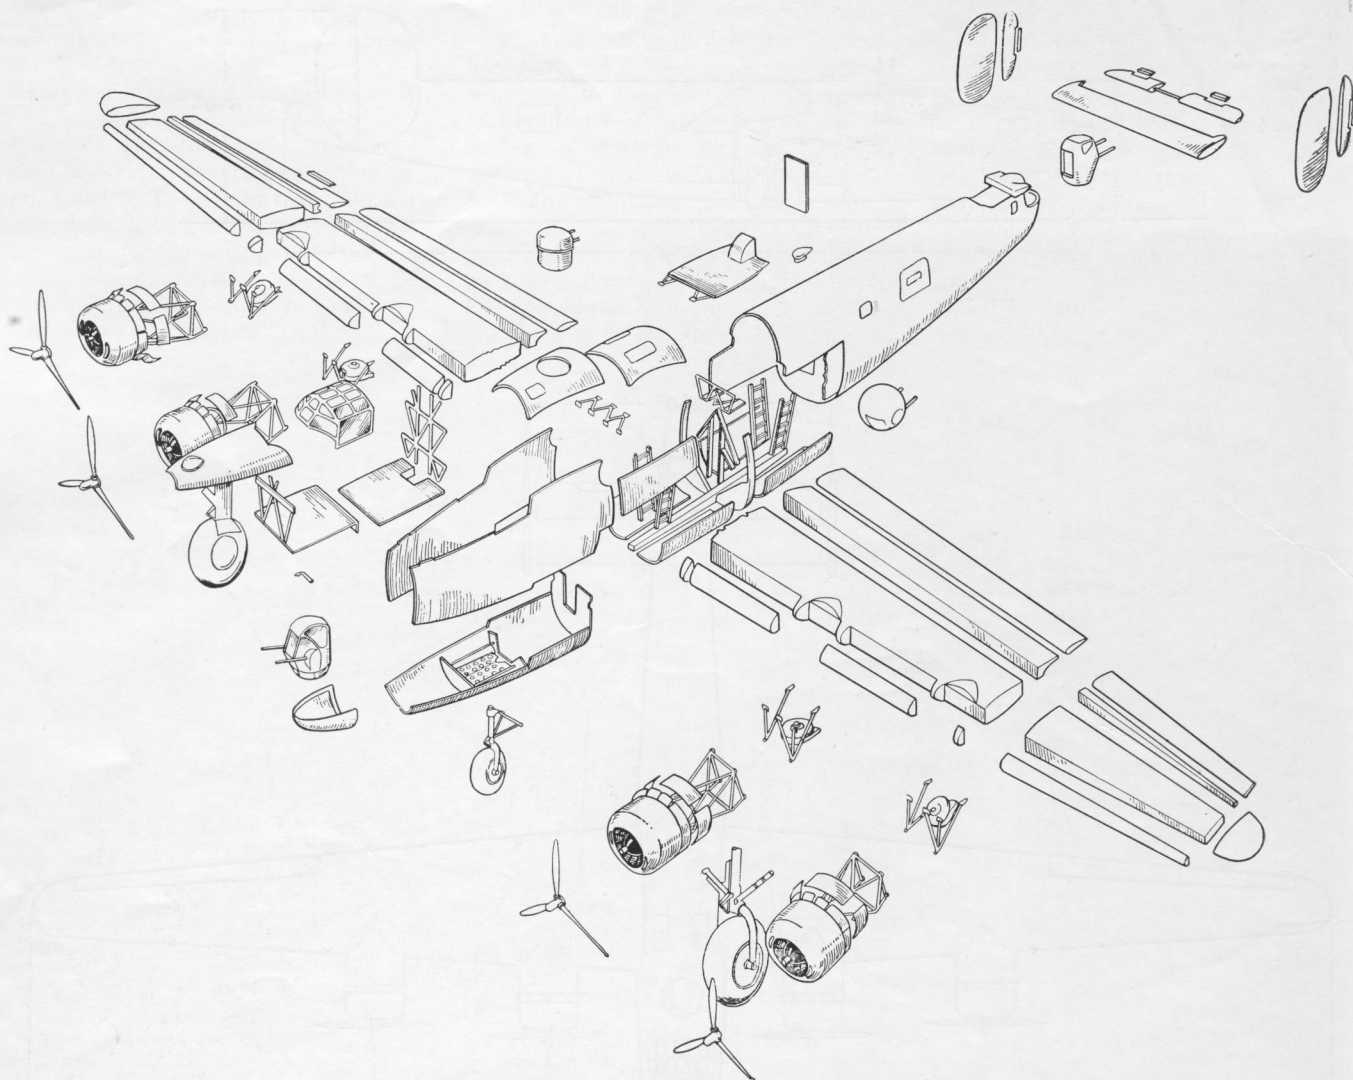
Exploded relation drawing depicting the major components of a B-24.
